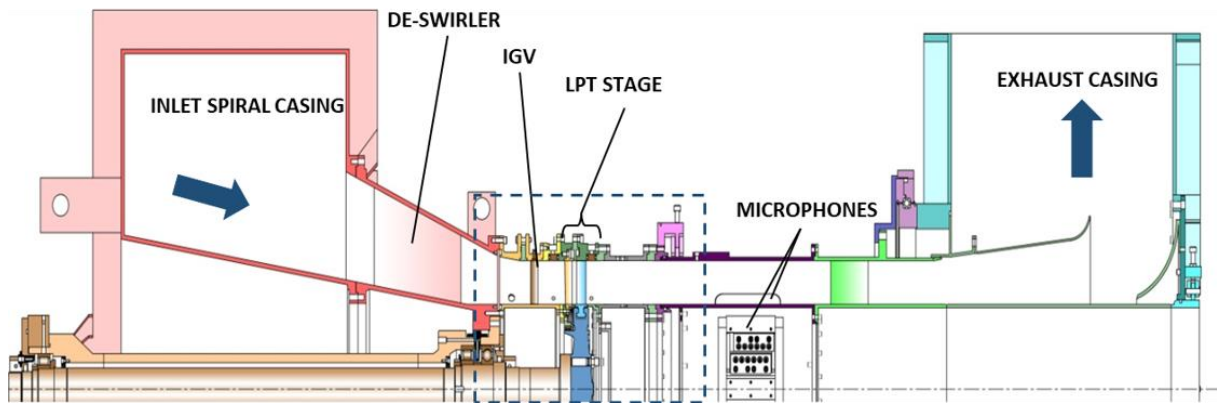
Cross section of the Subsonic Test Turbine Facility.
